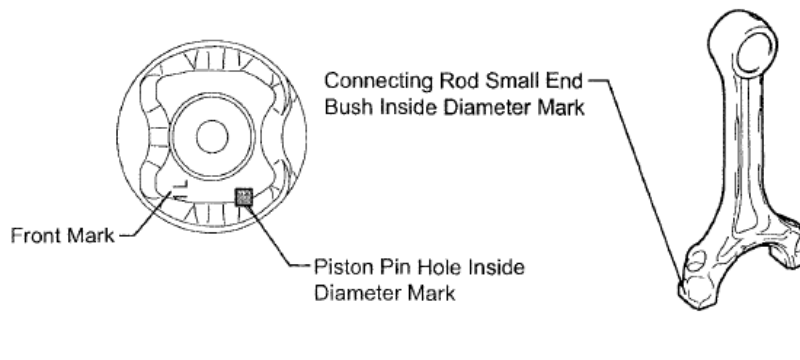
Identifying Mark On Piston, Piston Pin And Connecting Rod
